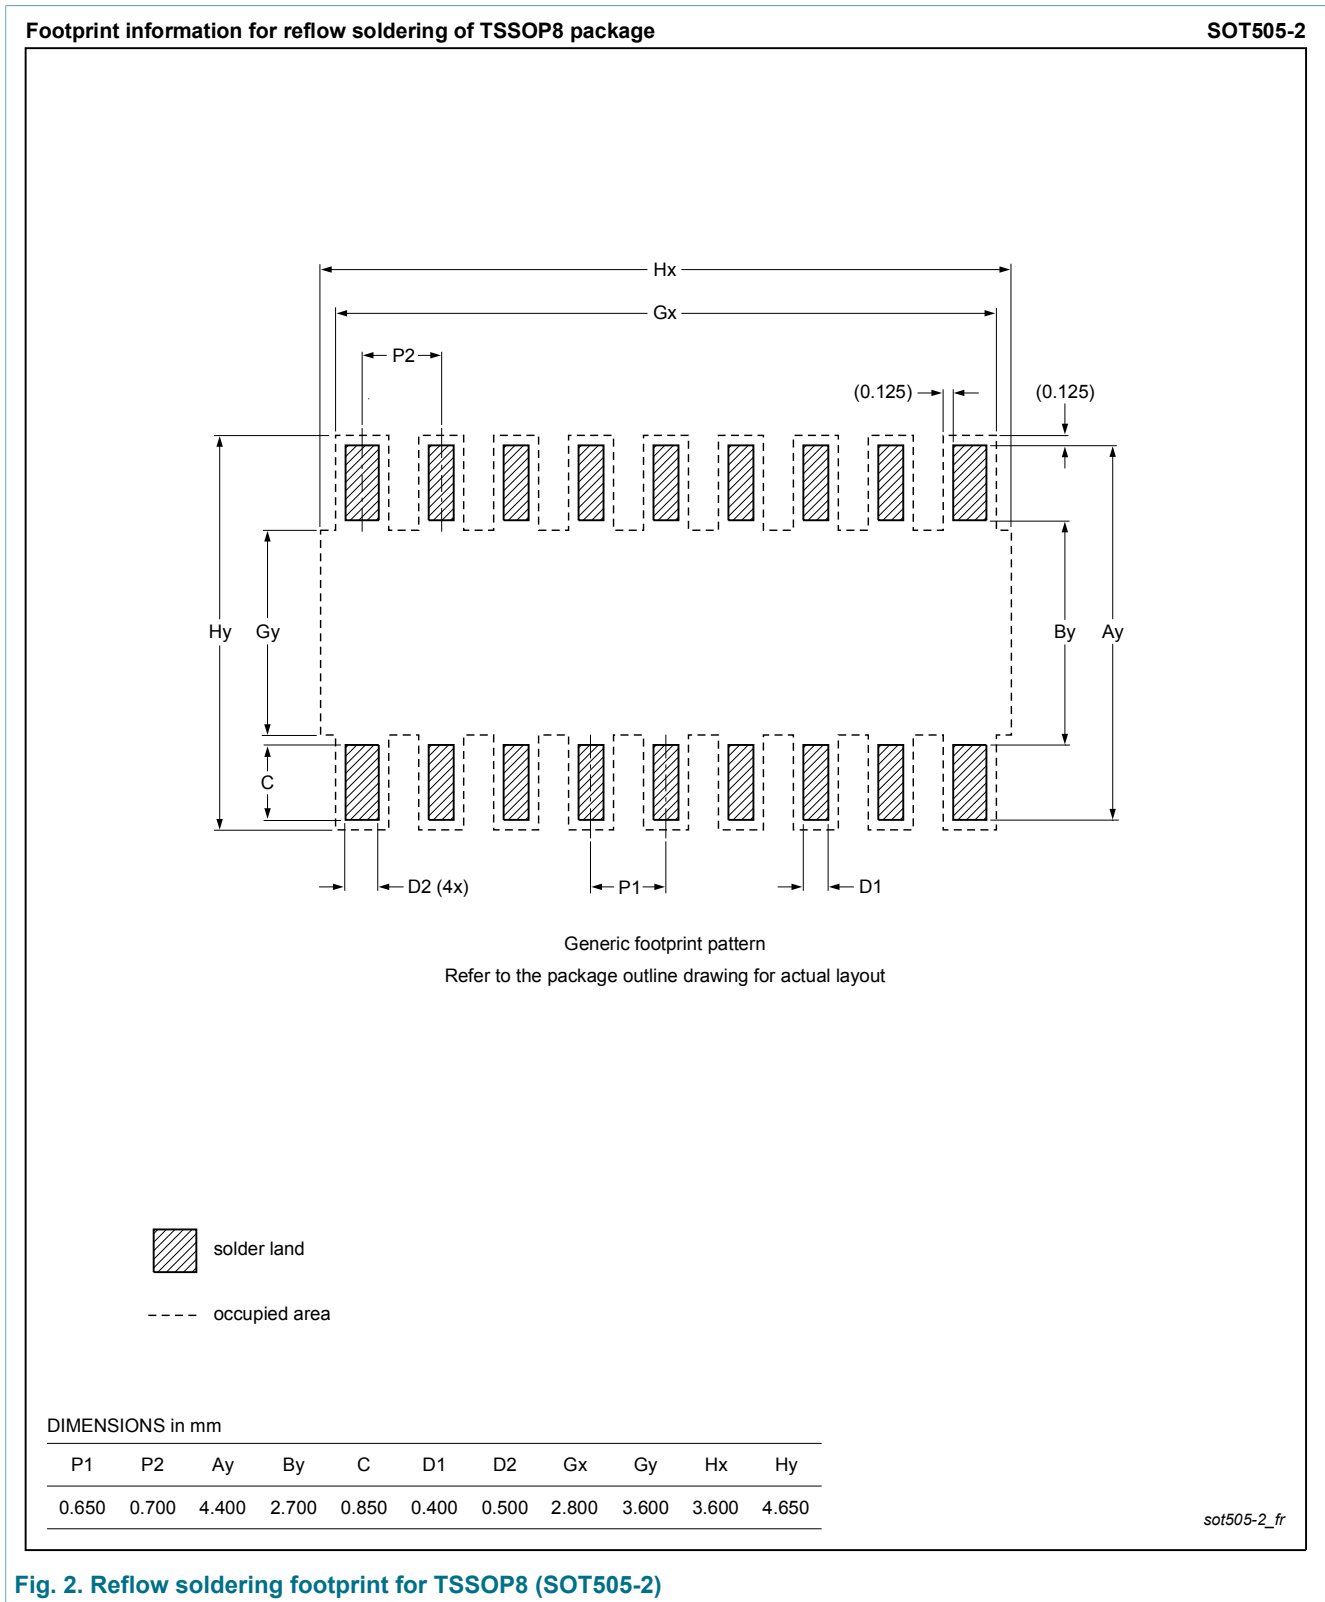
Reflow soldering footprint for TSSOP8 (SOT505-2)
